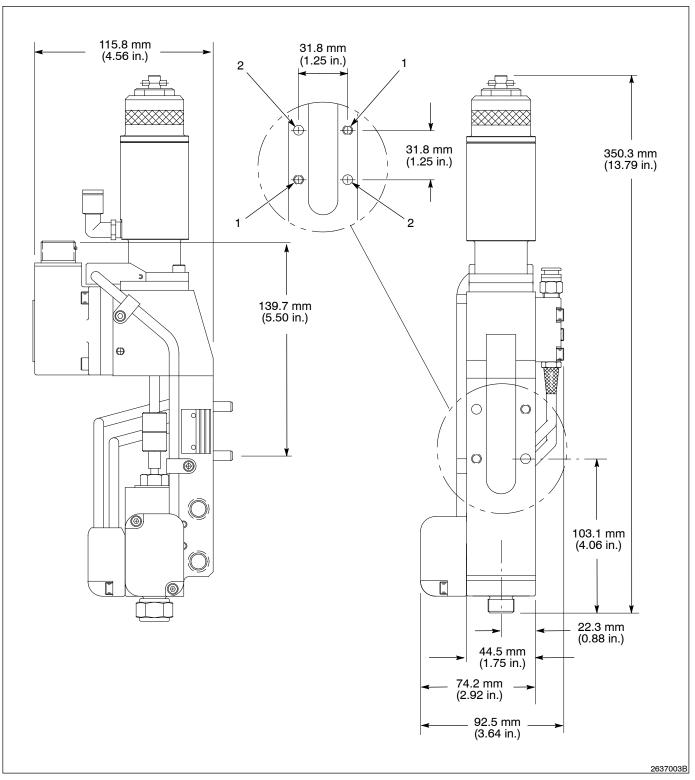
Pro-Flo III Standard Flow Dispensing Gun Dimensions
